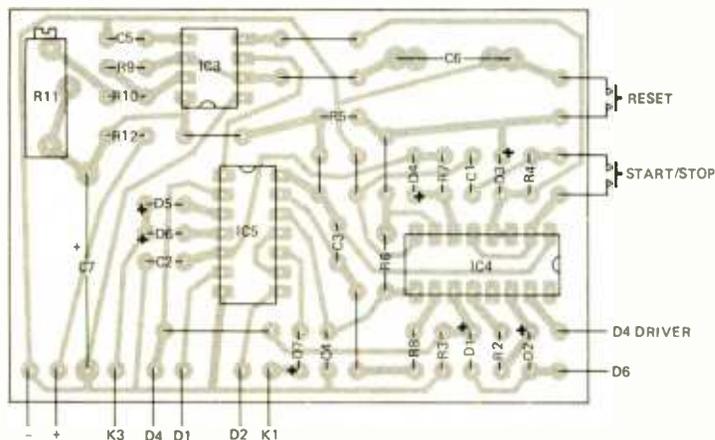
COMPONENT PLACEMENT of stopwatch circuit board. Connections are made to calculator board.
